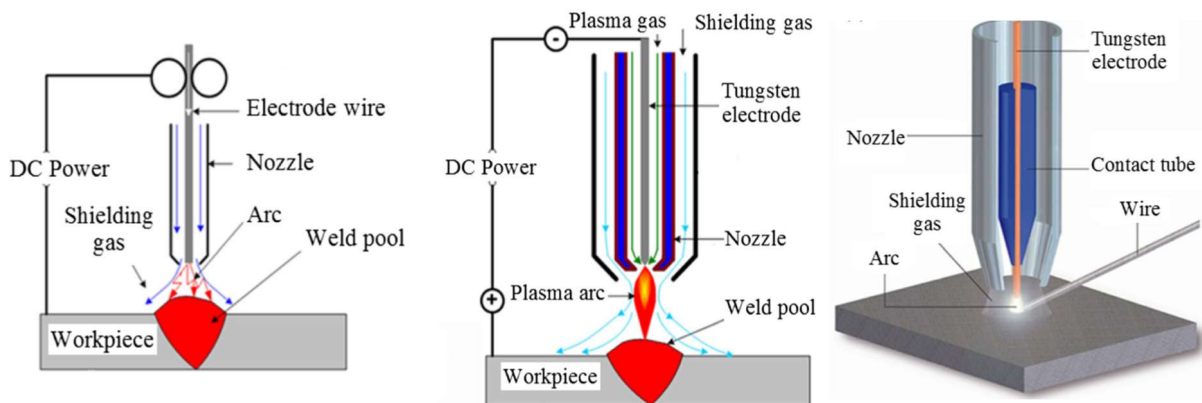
Gas metal arc welding (left), gas tungsten arc welding (centred) and plasma arc welding (right) (Donghong Ding, 2015)
